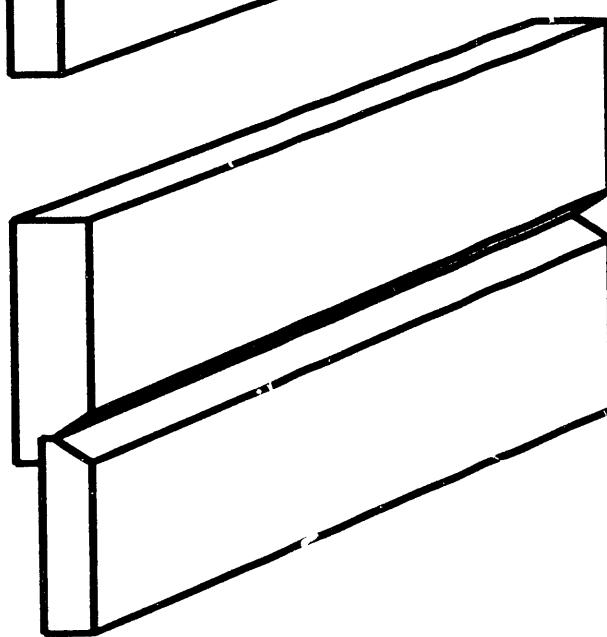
Schematic Illustrating the Cross-Section of a Plasma Arc Welded Waste Container Joint.
